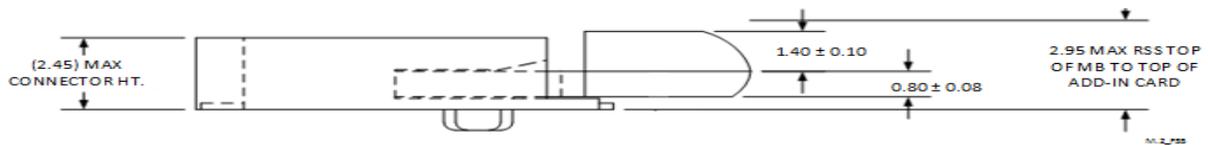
H2.5-S3 – Stack-up Top Mount Single-sided Add-in Card for 1.5 Maximum Top-side Component Height and with Higher Clearance above Motherboard
